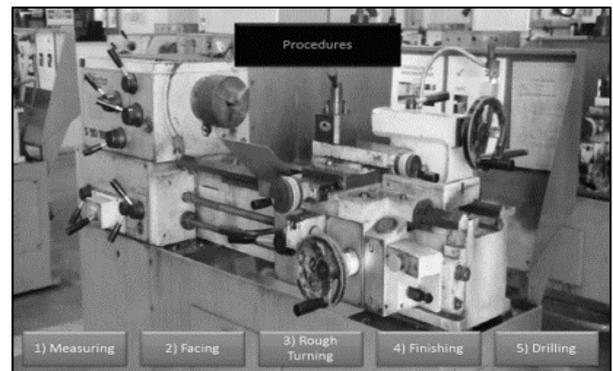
Sub-parts under the experiment procedure for Lathe Machine
